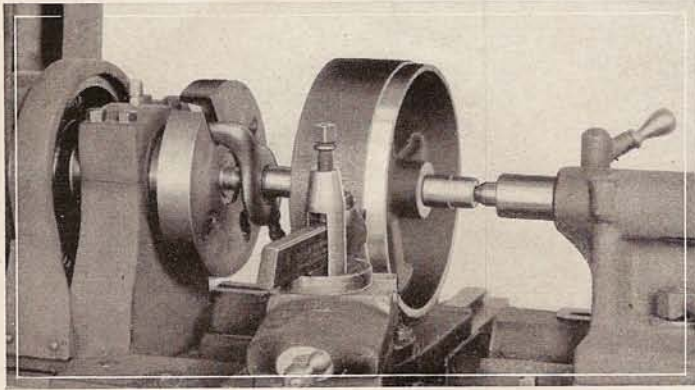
Machining a Cast Iron Pulley on a Mandrel Mounted Between the Centers of the No. 22—9-inch Junior Lathe
